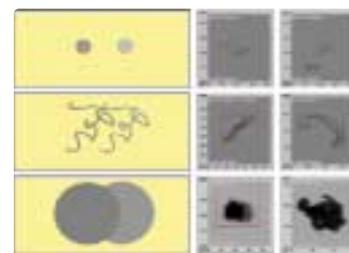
IQPC: accurate classification and real-size measurement of surface defects, irrespective of shape and contrast
